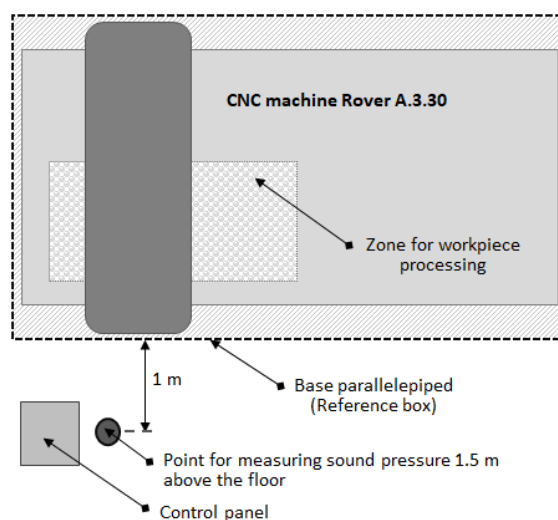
Diagram showing measuring point position and zone for workpiece processing
